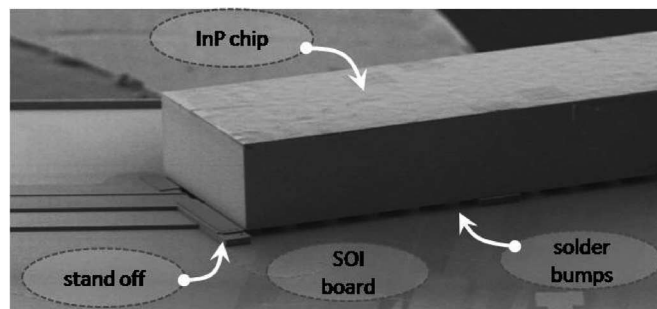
Flip-chip-soldered SOA on SOI motherboard.
